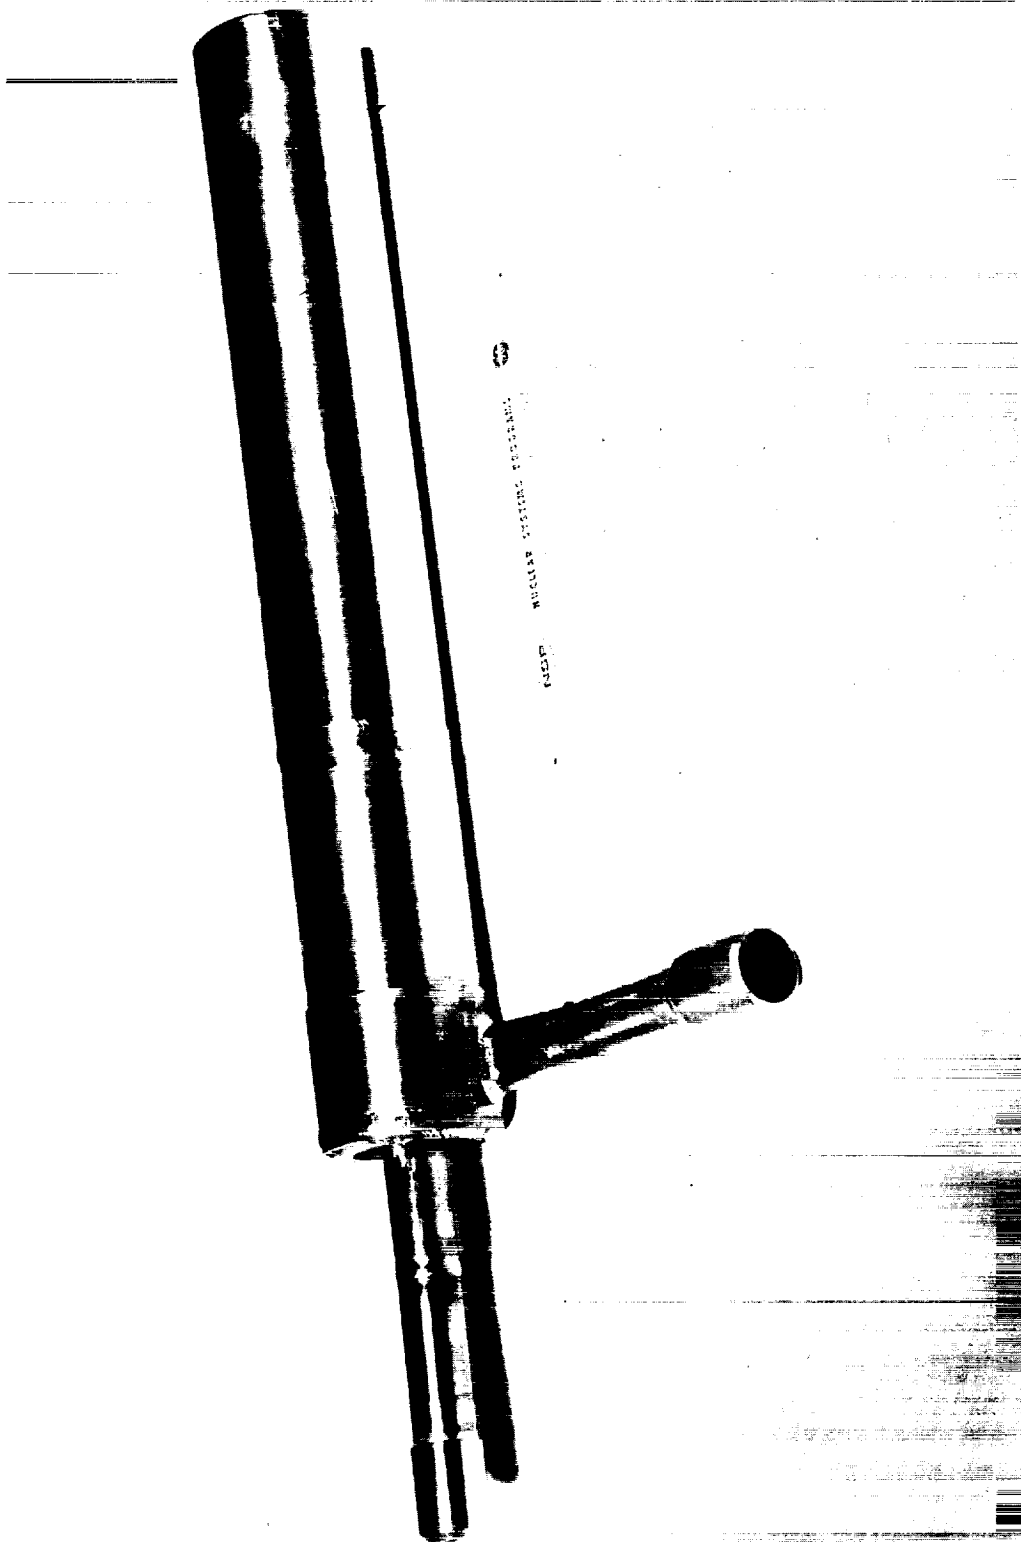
Completely Assembled and Leak Checked T-111 Duct for EM Boiler Feed Pump, Prior to Adding the Layers of Thermal Insulation.
